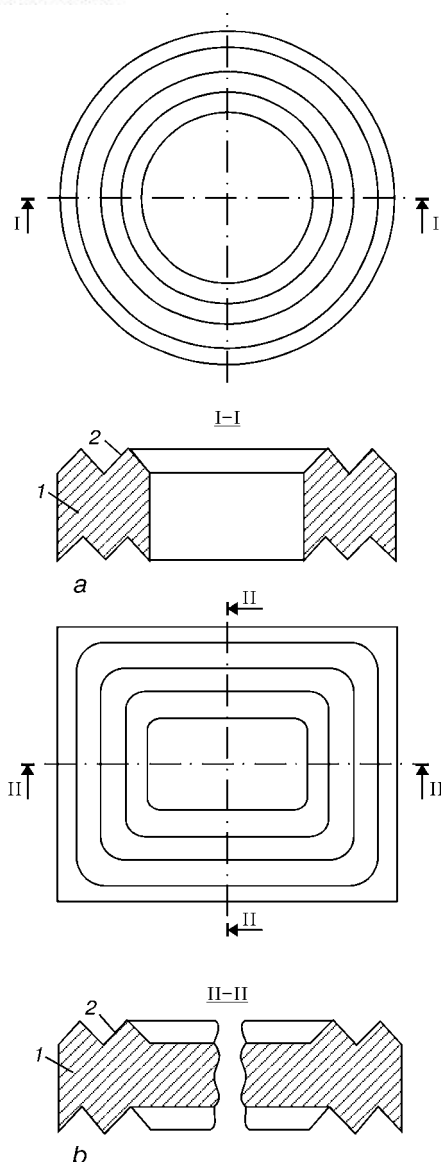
Schematic of the profiled hot tool for welding cylindrical parts (a) and parts of a rectangular section (b): 1 — hot tool; 2 — adhesion layer
